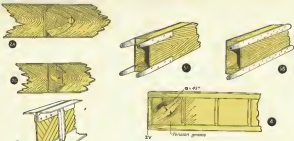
A section building is required to heavily stressed joints using both plywood and corner blocks. (a) A subpanel with stiff string and cross structural ply over a wood-plated plywood construction in which corner joints are built in a 2/12 in. ratio.
